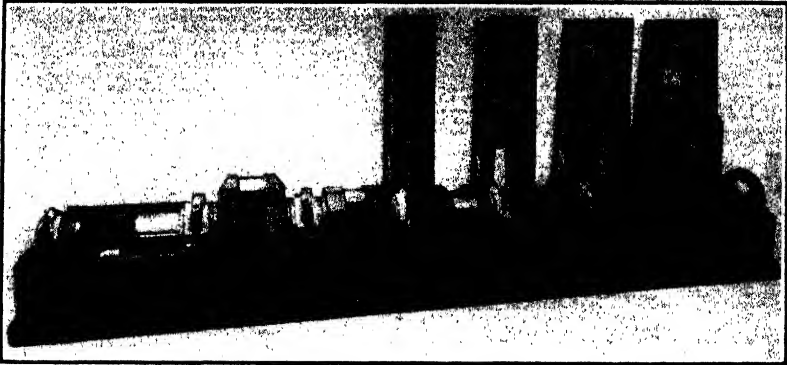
Lower base (bedplate) with crankshaft and several of the "A" frames in place.
